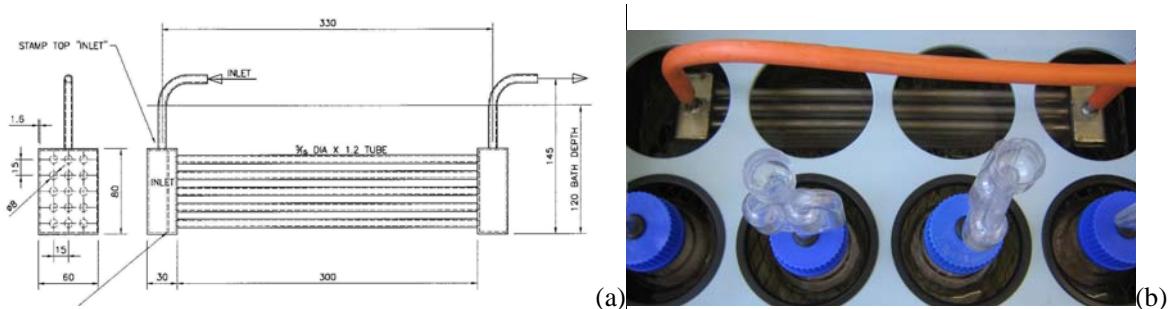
Engineering drawing (a) and photograph (b) of mash bath heat exchanger assembly.
